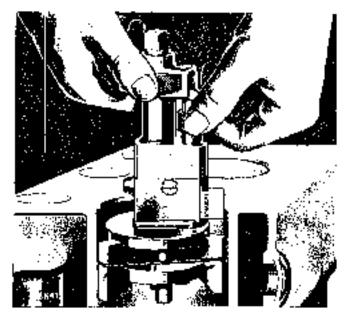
Removing Cylinder Bore Ridge (1936-42 Models)
